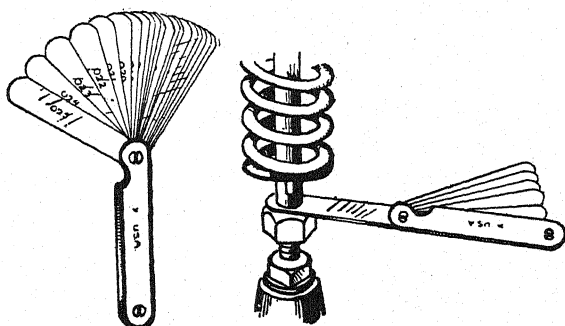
Measuring valve-stem clearance with thickness gauge.
